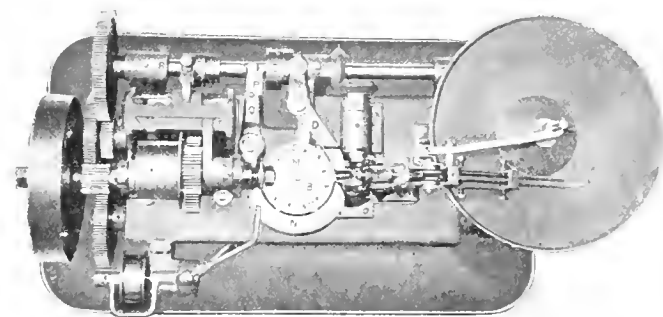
Plan View of Screw Slotting Machine, showing Work-feeding and holding Mechanism.
